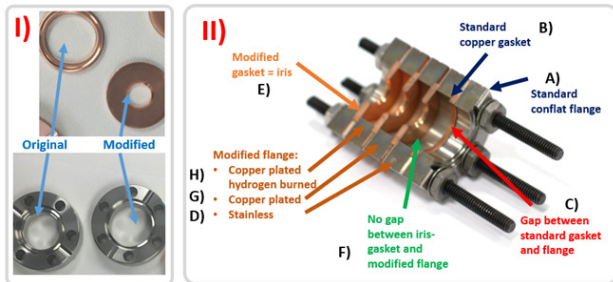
I) Original conflat flange and gasket, compared to modified conflat flange-cell and gasket-iris for brazeless assembly. II) Cut assembly of standard and modified conflat parts for comparison. Standard conflat flange A) with standard conflat gasket B) produce a micro gap C). Modified flange with modified gasket indeed produce an accelerating waveguide-like structure without gaps at the vacuum-RF contact. Some flanges are copper-plated, and some of them are hydrogen burned (bright copper).
